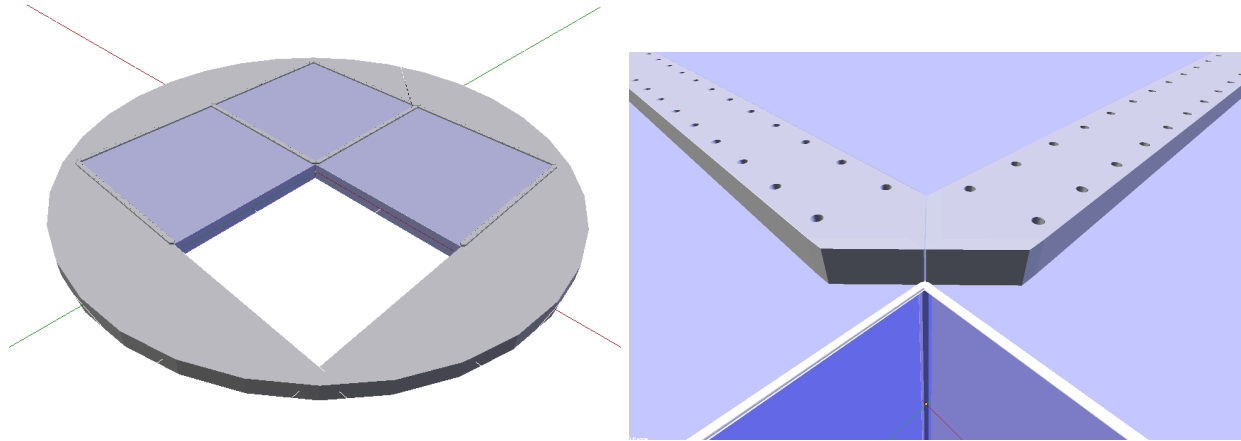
Design of the cryostat top flange and of the sealing scheme. Left: view of the 4-module detector top flange with one module extracted. Right: details of the sealing structure.
